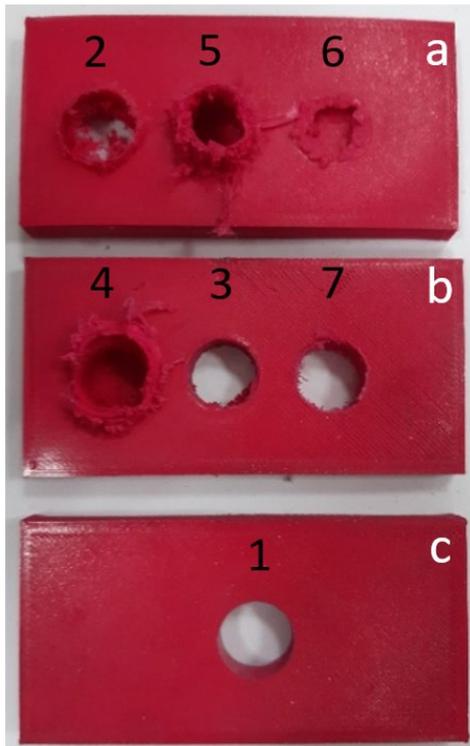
Overview of tested PLA plates processed with 7 different end mill cutting tool samples.
